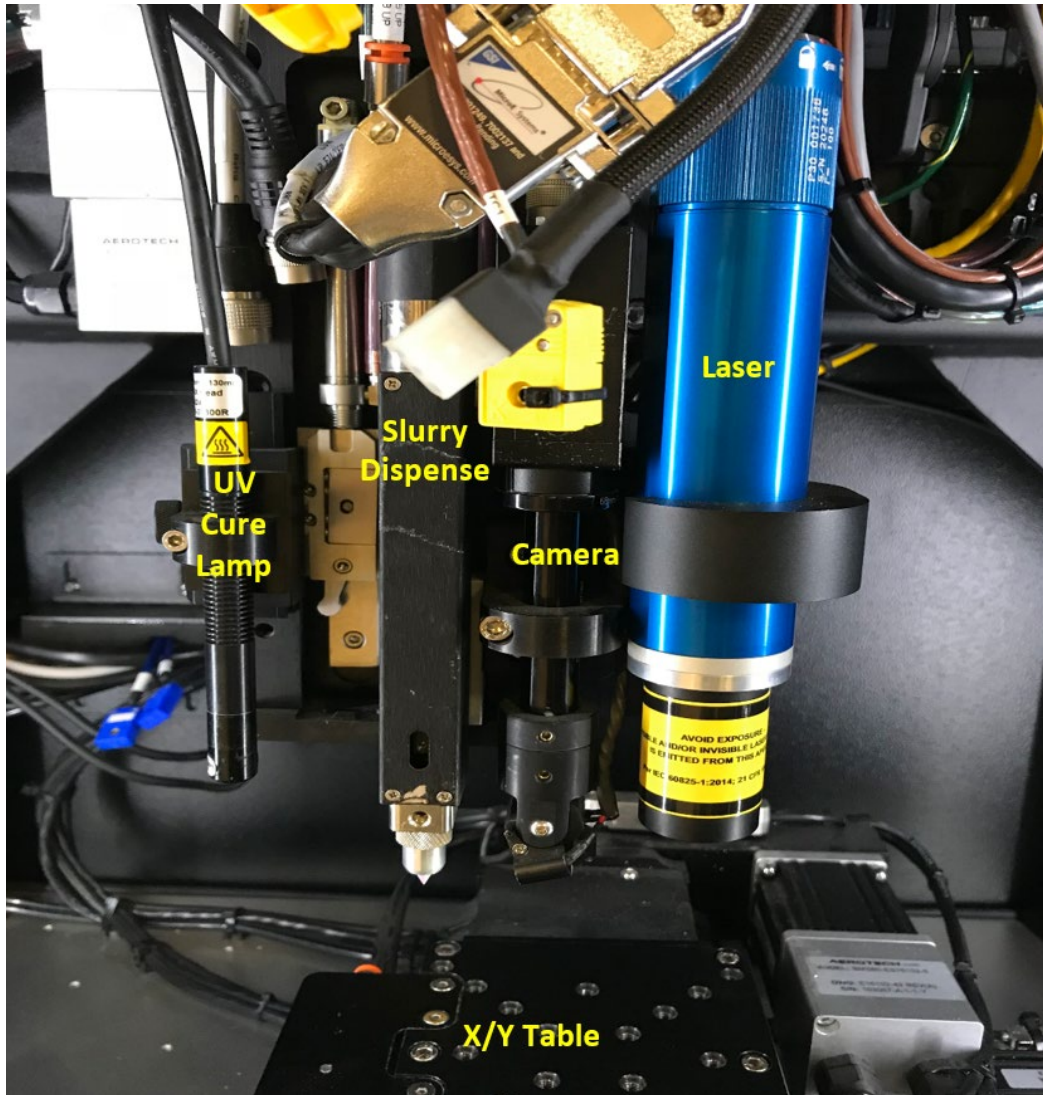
n-Script machine tool array and x/y table with YAG laser, process monitor camera, slurry dispense tool, and UV cure lamp. Fused deposition modeling head is not installed. The tool array is stationary in the x/y direction and moves only in the z (vertical) direction.
